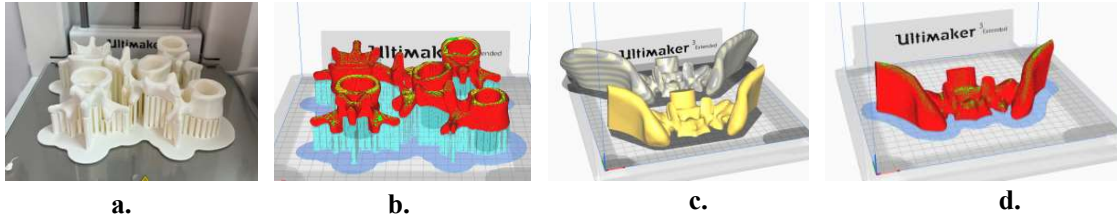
3D printing of lumbar spine model components; a, b – 3D printed L1-L5 vertebrae and Cura preview showing the support structure; c, d – Cura prepare and preview of trimmed pelvic base 3D printing with no support structure
